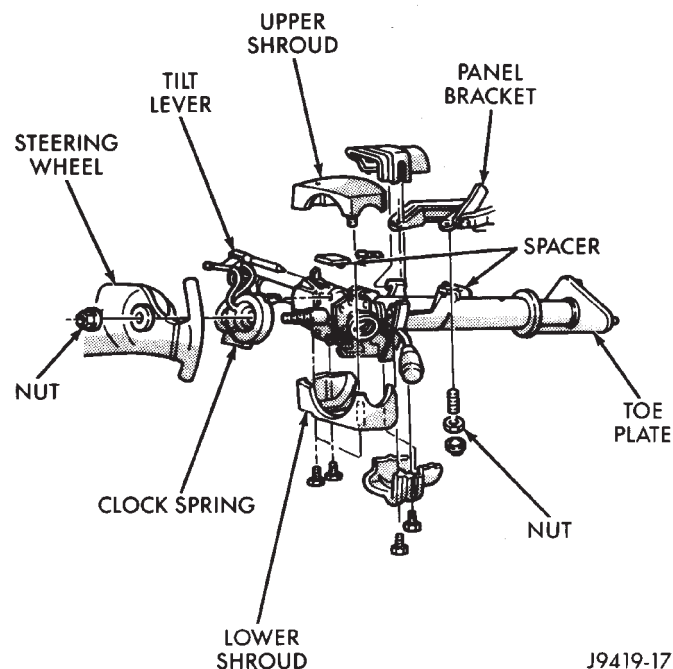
Steering Column Shrouds Remove/Install - Typical
